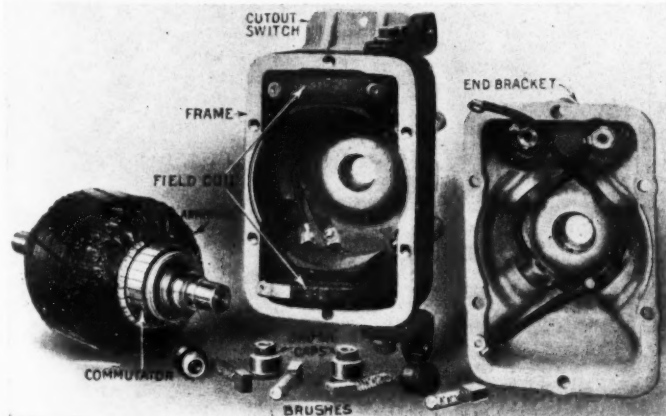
Interior of Westinghouse generators, showing the connections, armature removed and other parts
